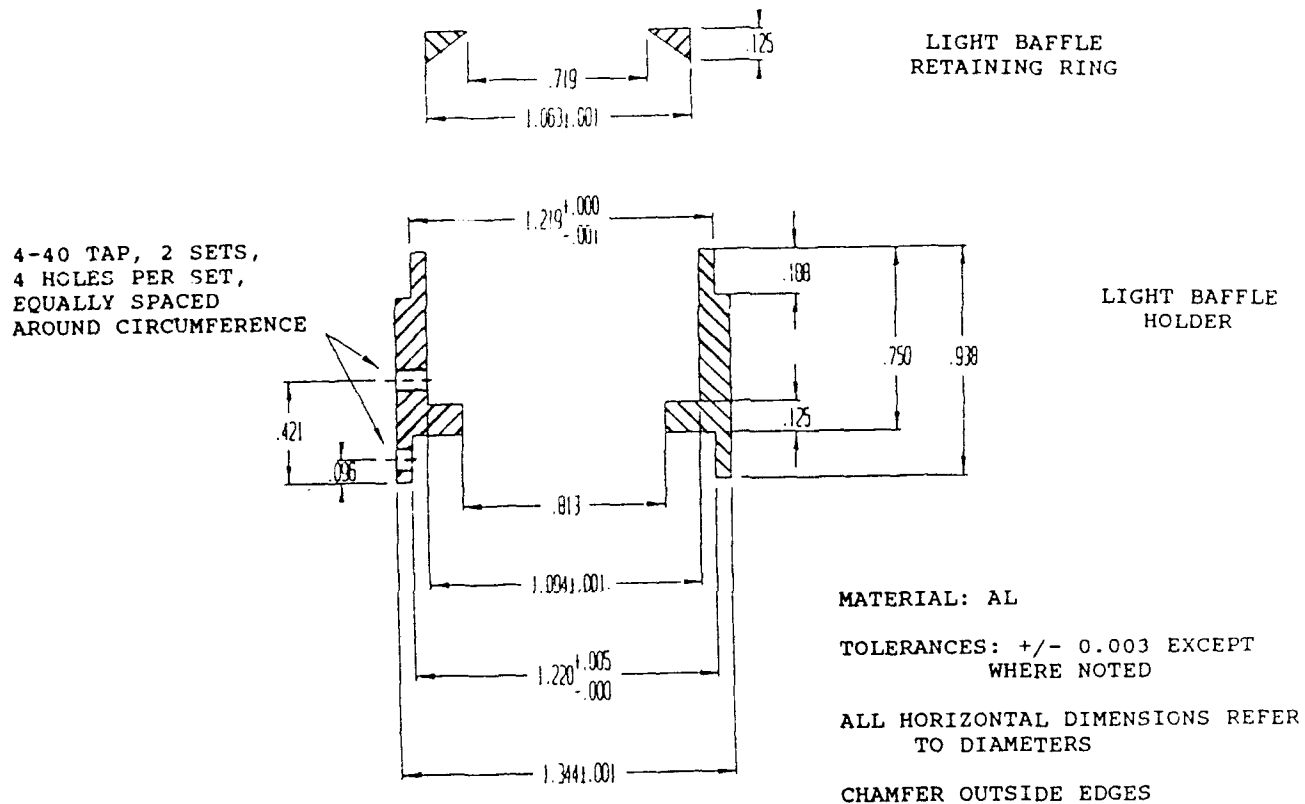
Cross Sectional Drawing of Two Piece Light Baffle Mount Consisting of Retaining Ring and Holder. All dimensions Are in Inches (1.00 Inch = 2.54 cm).
